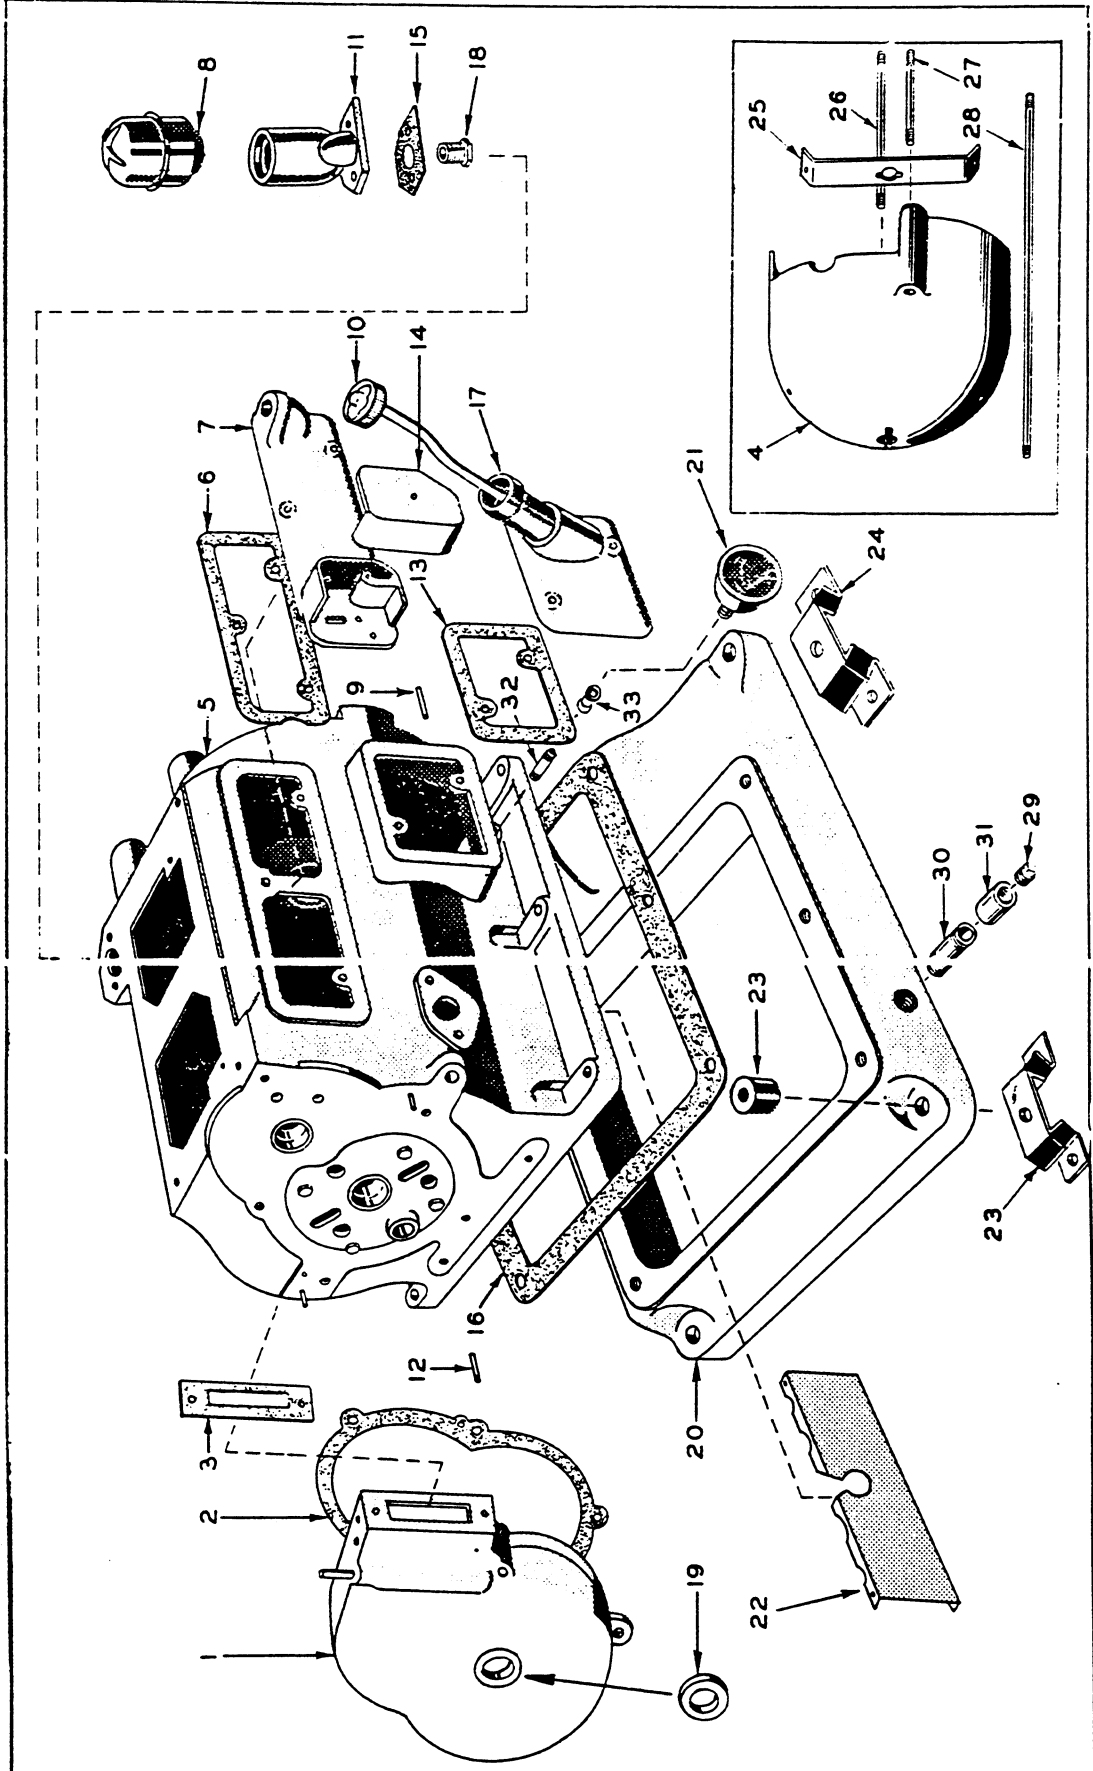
FIG. A - CRANKCASE, OIL BASE, AND GEAR COVER GROUP
